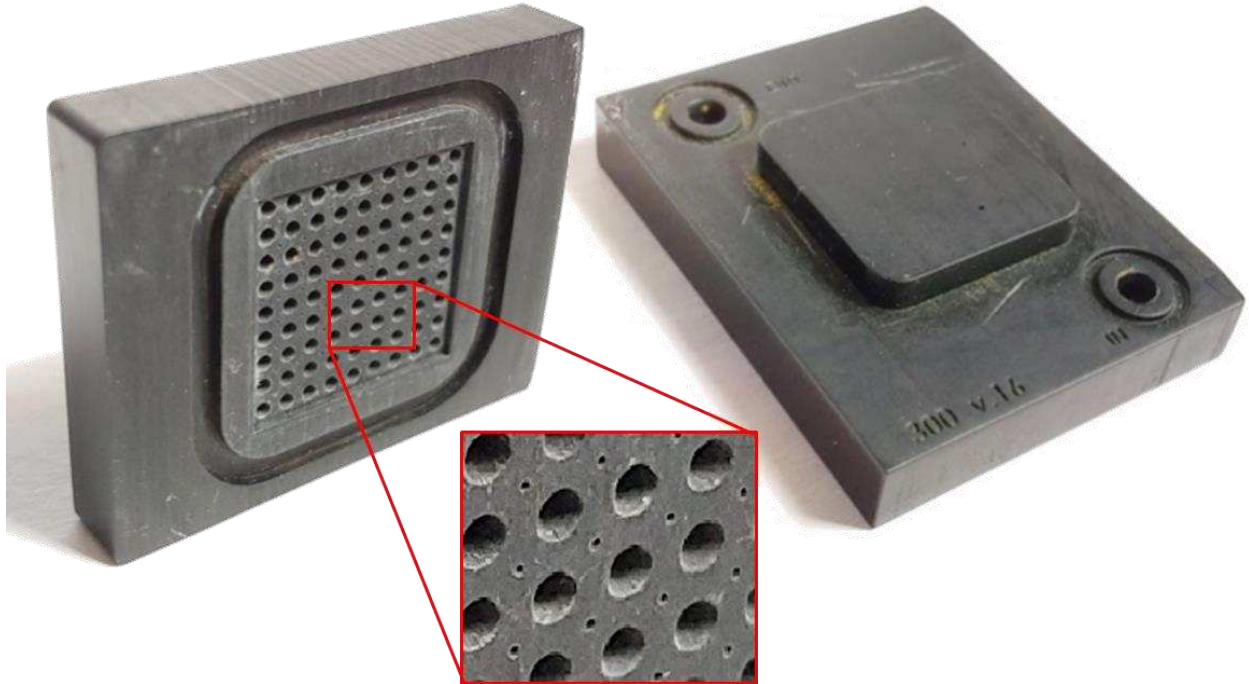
Photograph of the 3D-printed jet impingent device used heat transfer and pressure testing, printed on the Kudo 3D Titan 2 printer
